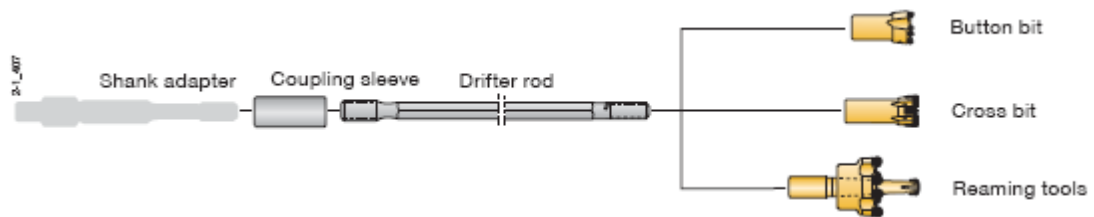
Carburized drifter rod and other parts (*Top Hammer Drilling Tools Product Catalog*).
